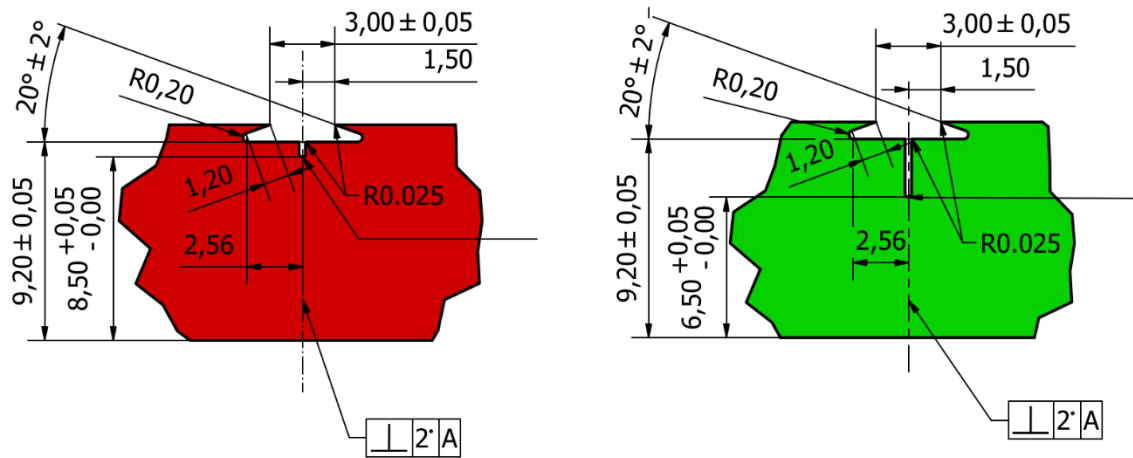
The two , a/W 0.2 (red) and a/W 0.5 (green),machined notch and knife edge geometries, dimensions in [mm].
